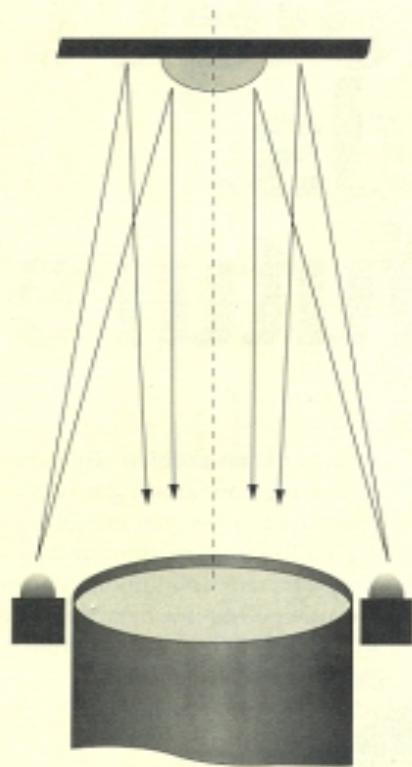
Effect of placement equipment vision system on inspection of bump-array packages. Larger pitch BGAs are typically placed via front lighting with bump-array inspection. Back lighting uses the part outline only to neutralize part-to-part variations.
